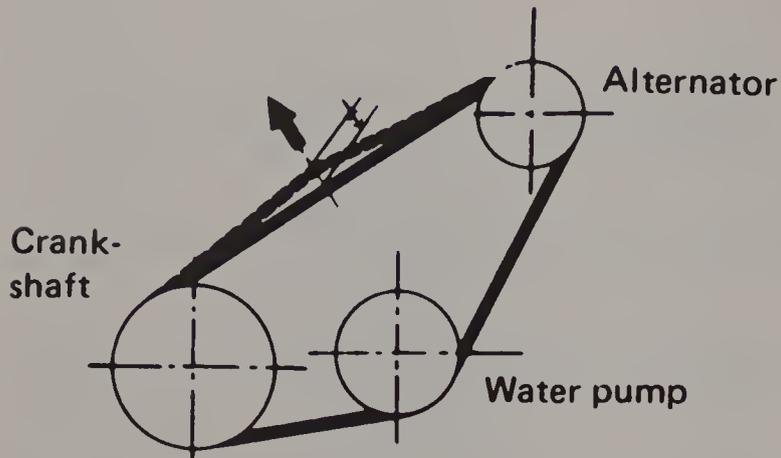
Alternator drivebelt tension check (Sec 11)
